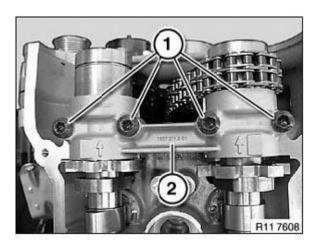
Identifying Screws And Bearing Cap Courtesy of BMW OF NORTH AMERICA, INC.
